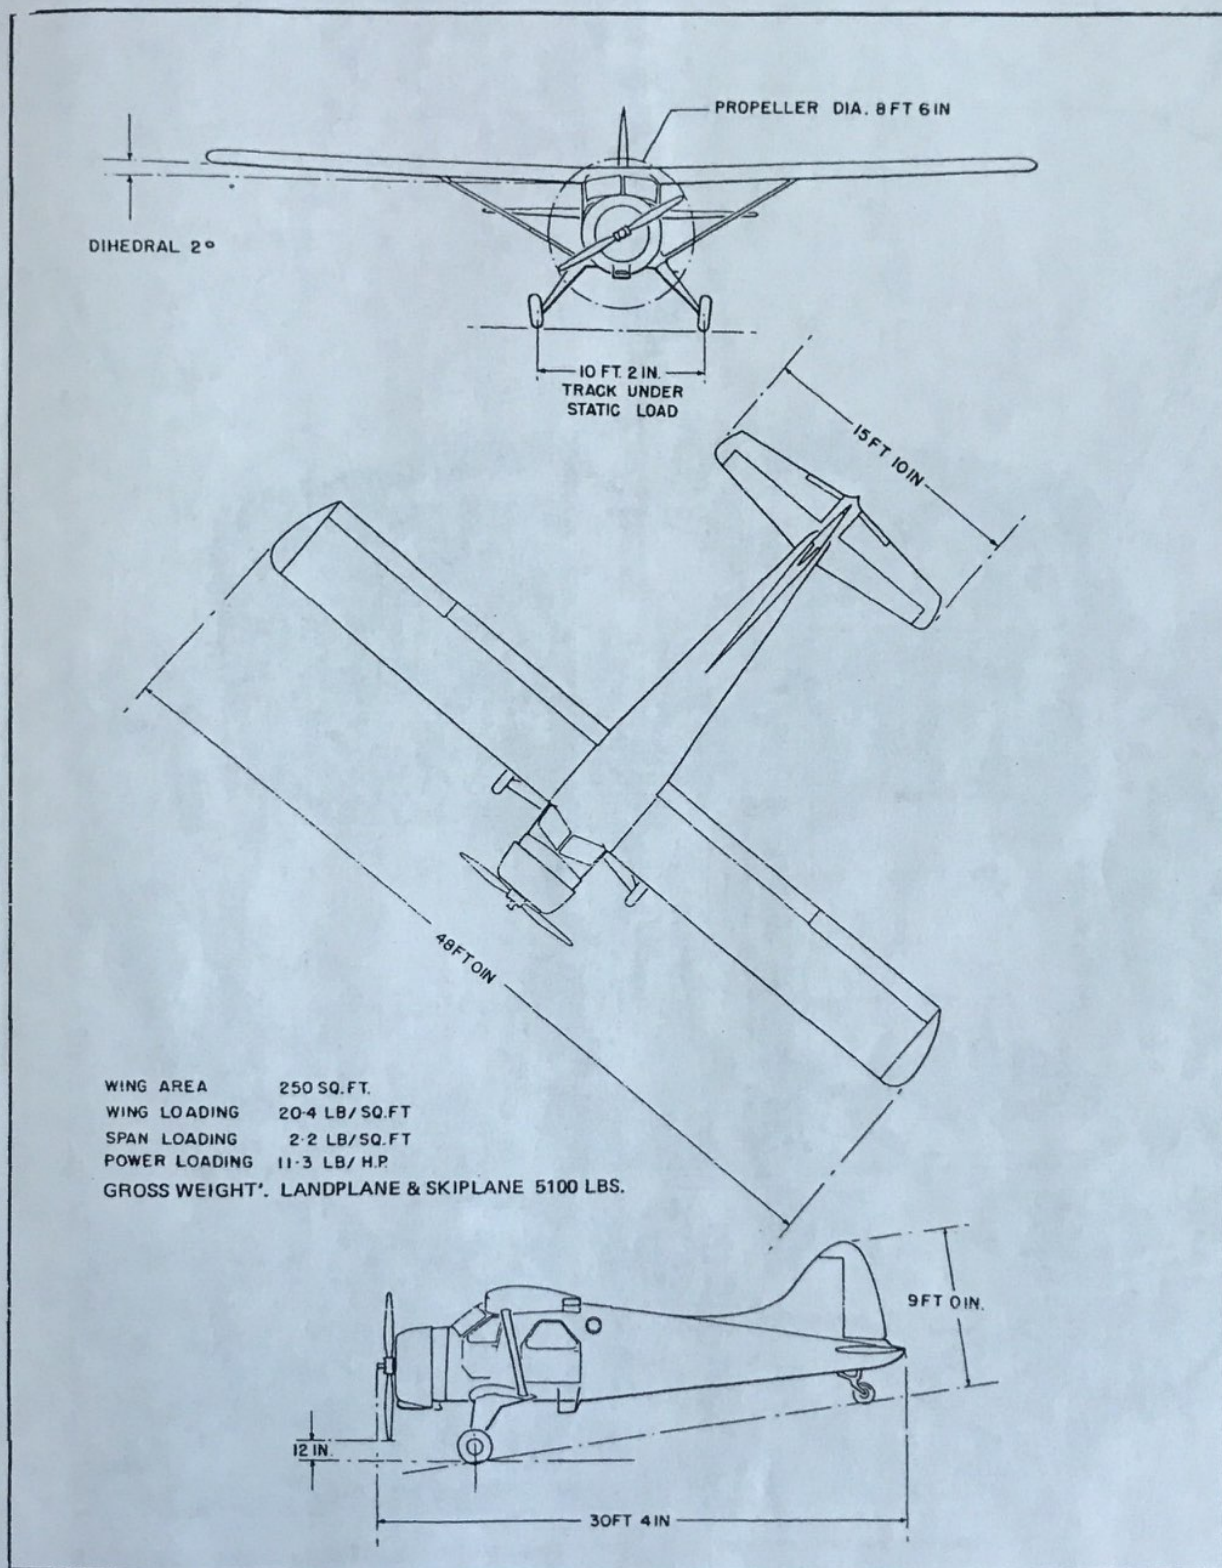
THREE VIEW DIMENSIONAL DIAGRAM - LANDPLANE
